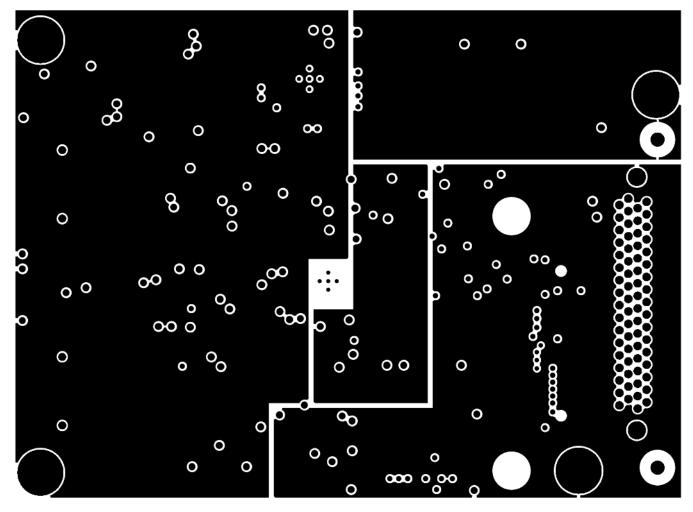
ADS9110EVM PCB Layer 3: Power Planes
